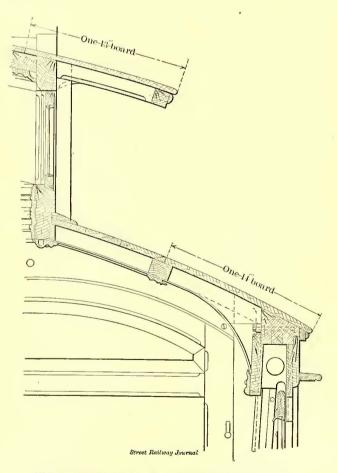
CROSS SECTION SHOWING ROOF BOARDS
